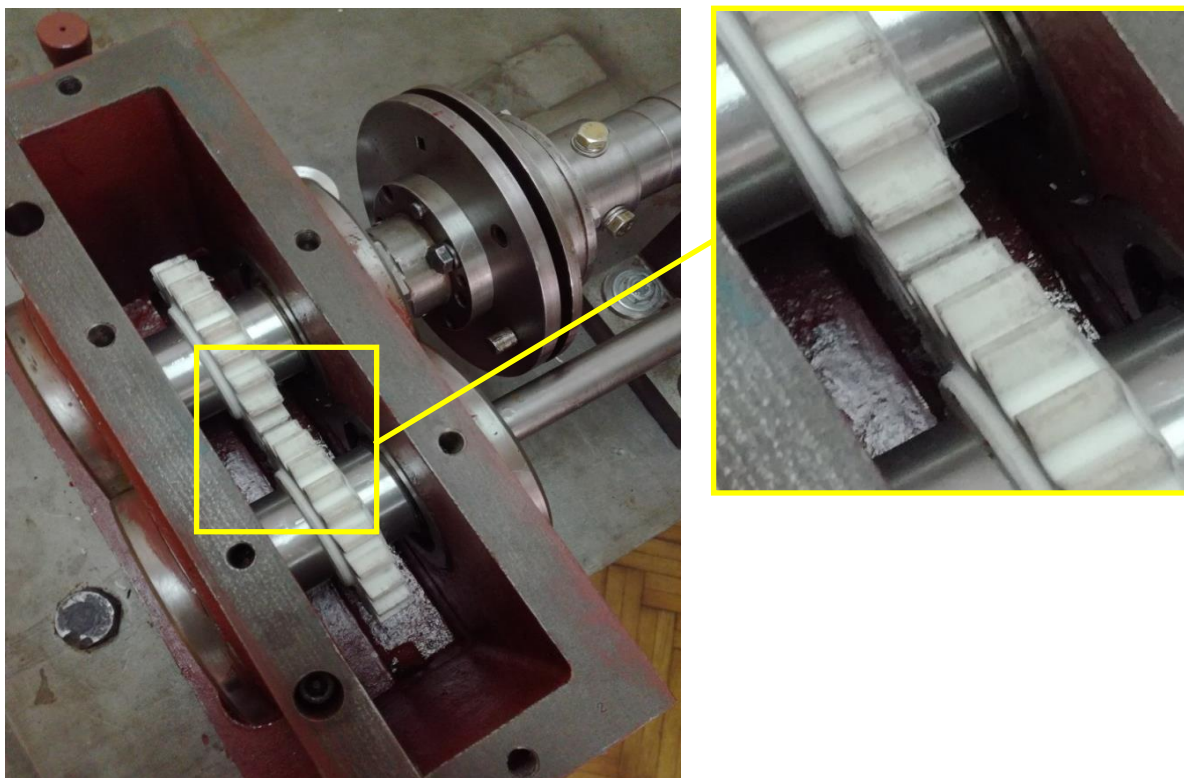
Worn off teeth flank surfaces of the tested PLA gears
